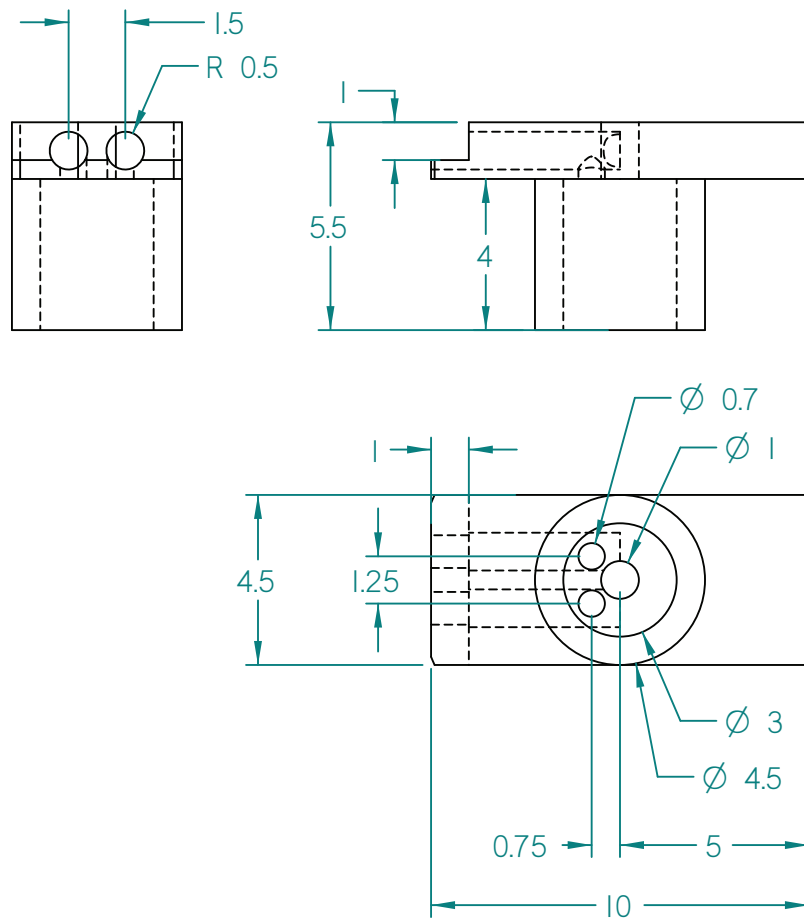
Pickup shield dimensions (mm). Material: Brass. 5:1 scale.
